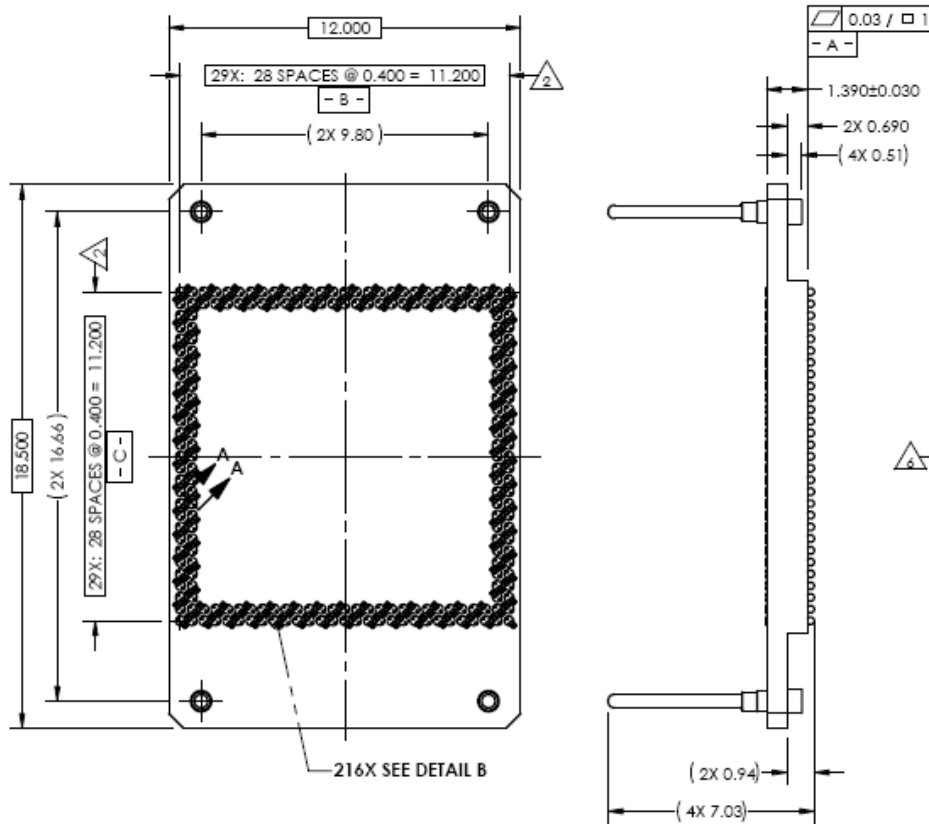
LPDDR3-216 ball PoP Target Socket Dimensions
